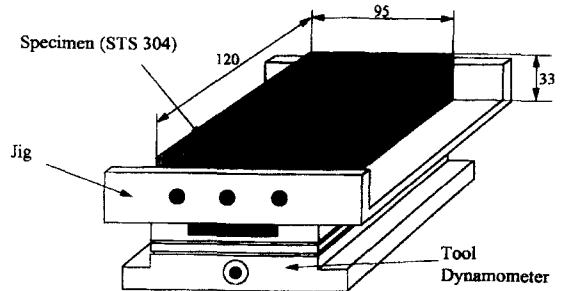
The shape combined specimen(STS 304), jig and tool dynamometer(mm)
